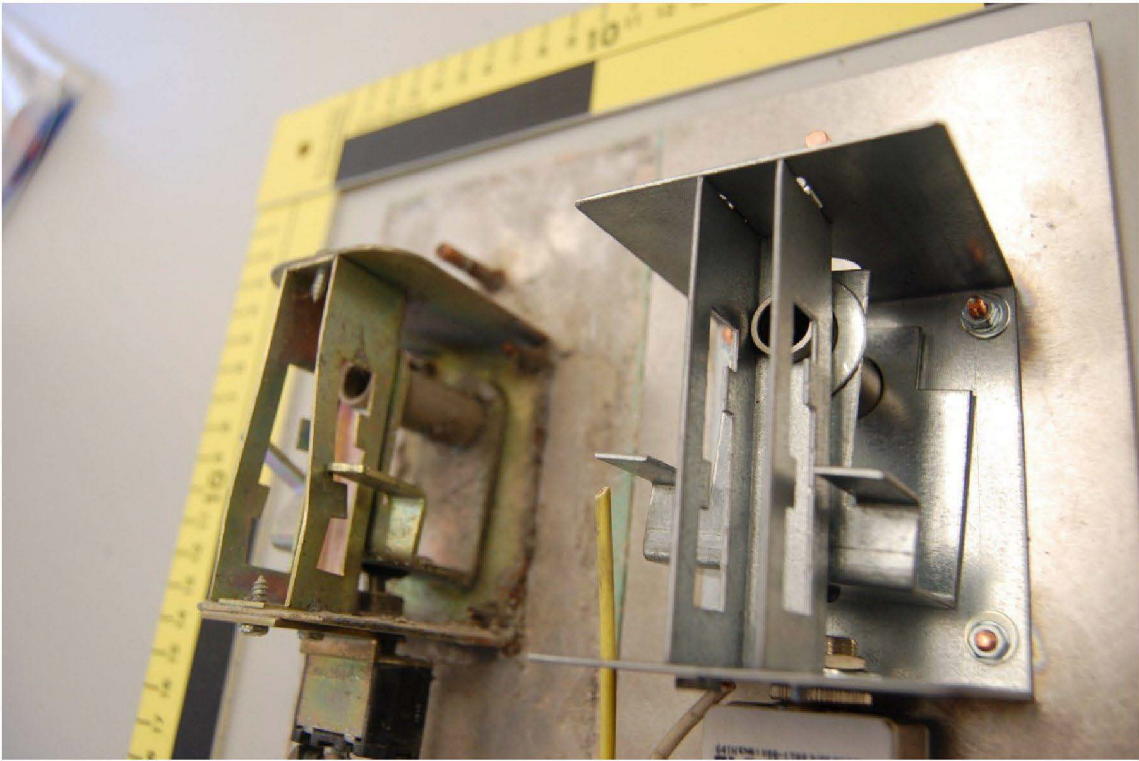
BJD/74 (left) and ER/2 (right) – Side view detailing deformer ‘side wards’
